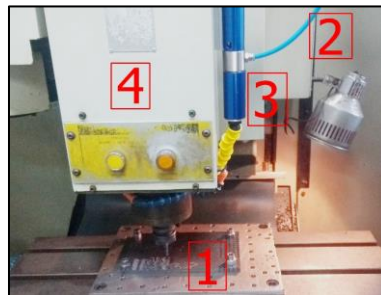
Experimental setup: [1] CFRP's plate; [2] Compressed-air line; [3] Vortex tube; [4] Machining center.
